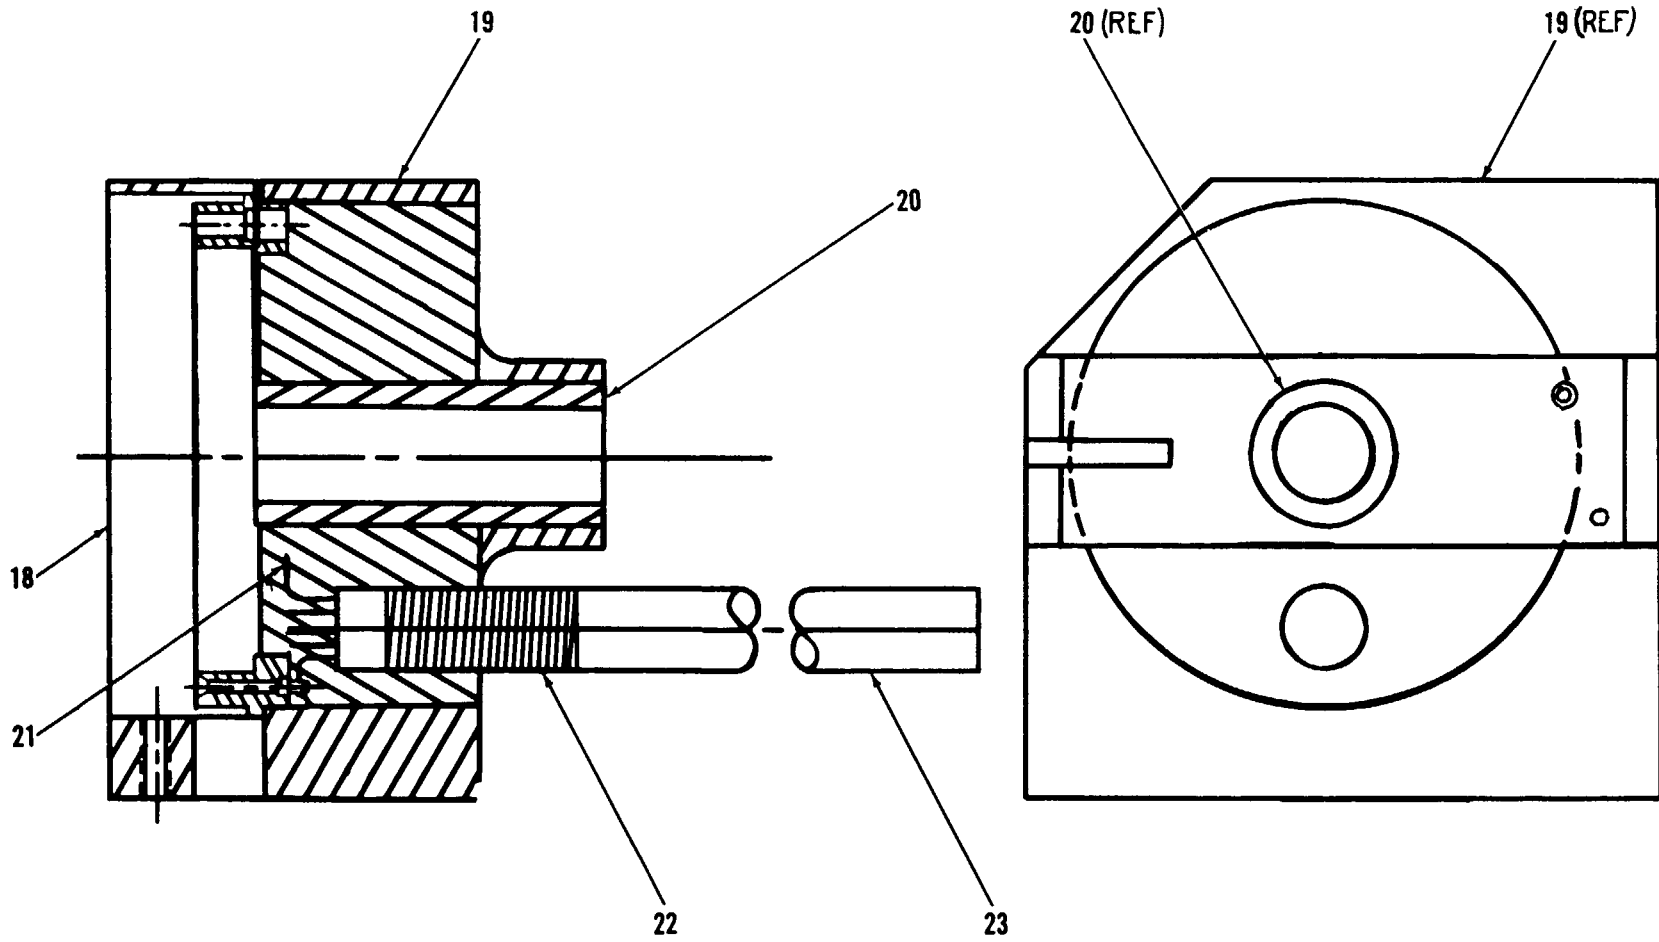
Holding and Ejecting Fixture (Sheet 2 of 2)
